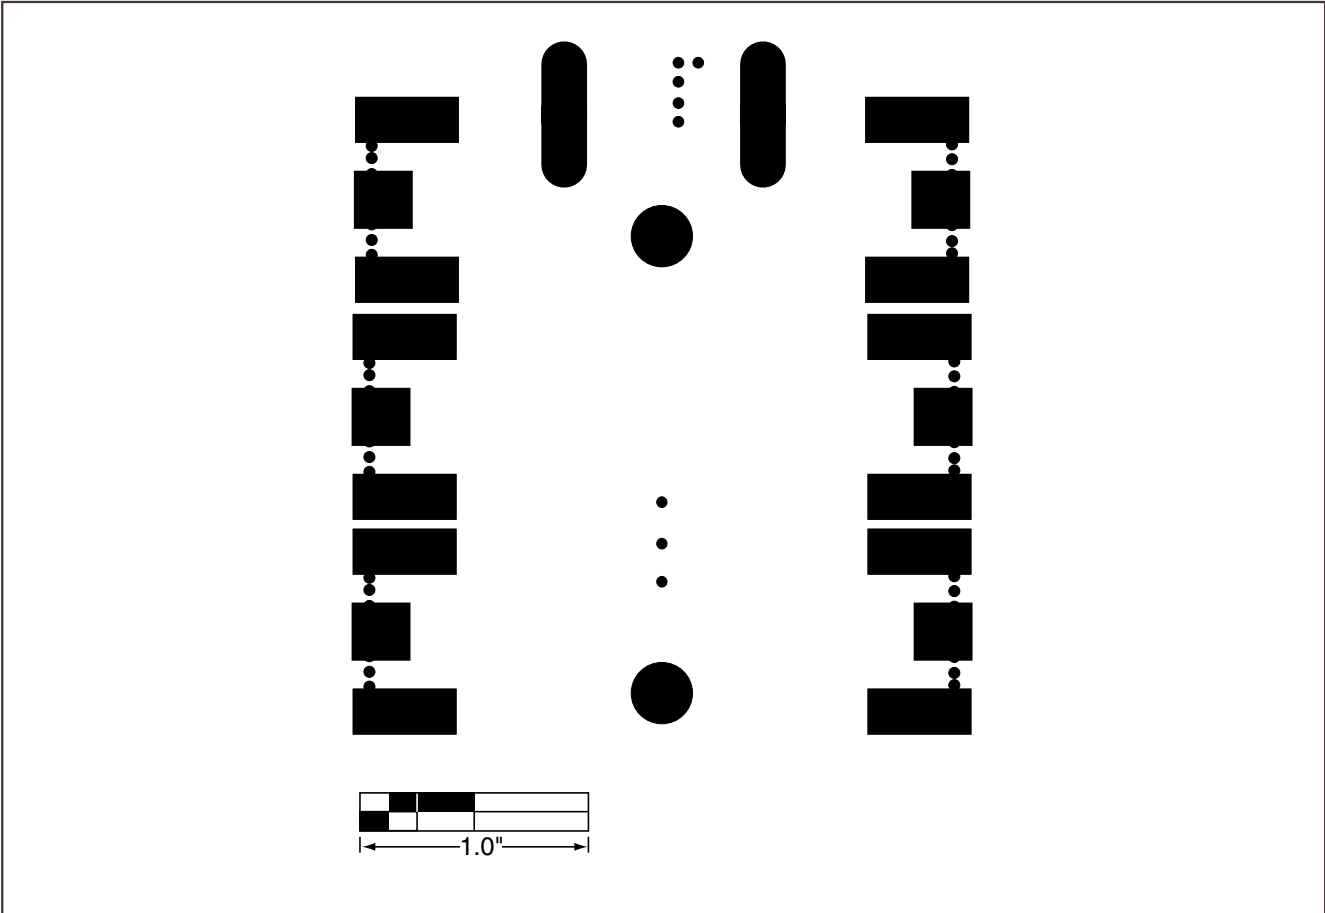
MAX3785 EV Kit PC Board Layout—Bottom Side
